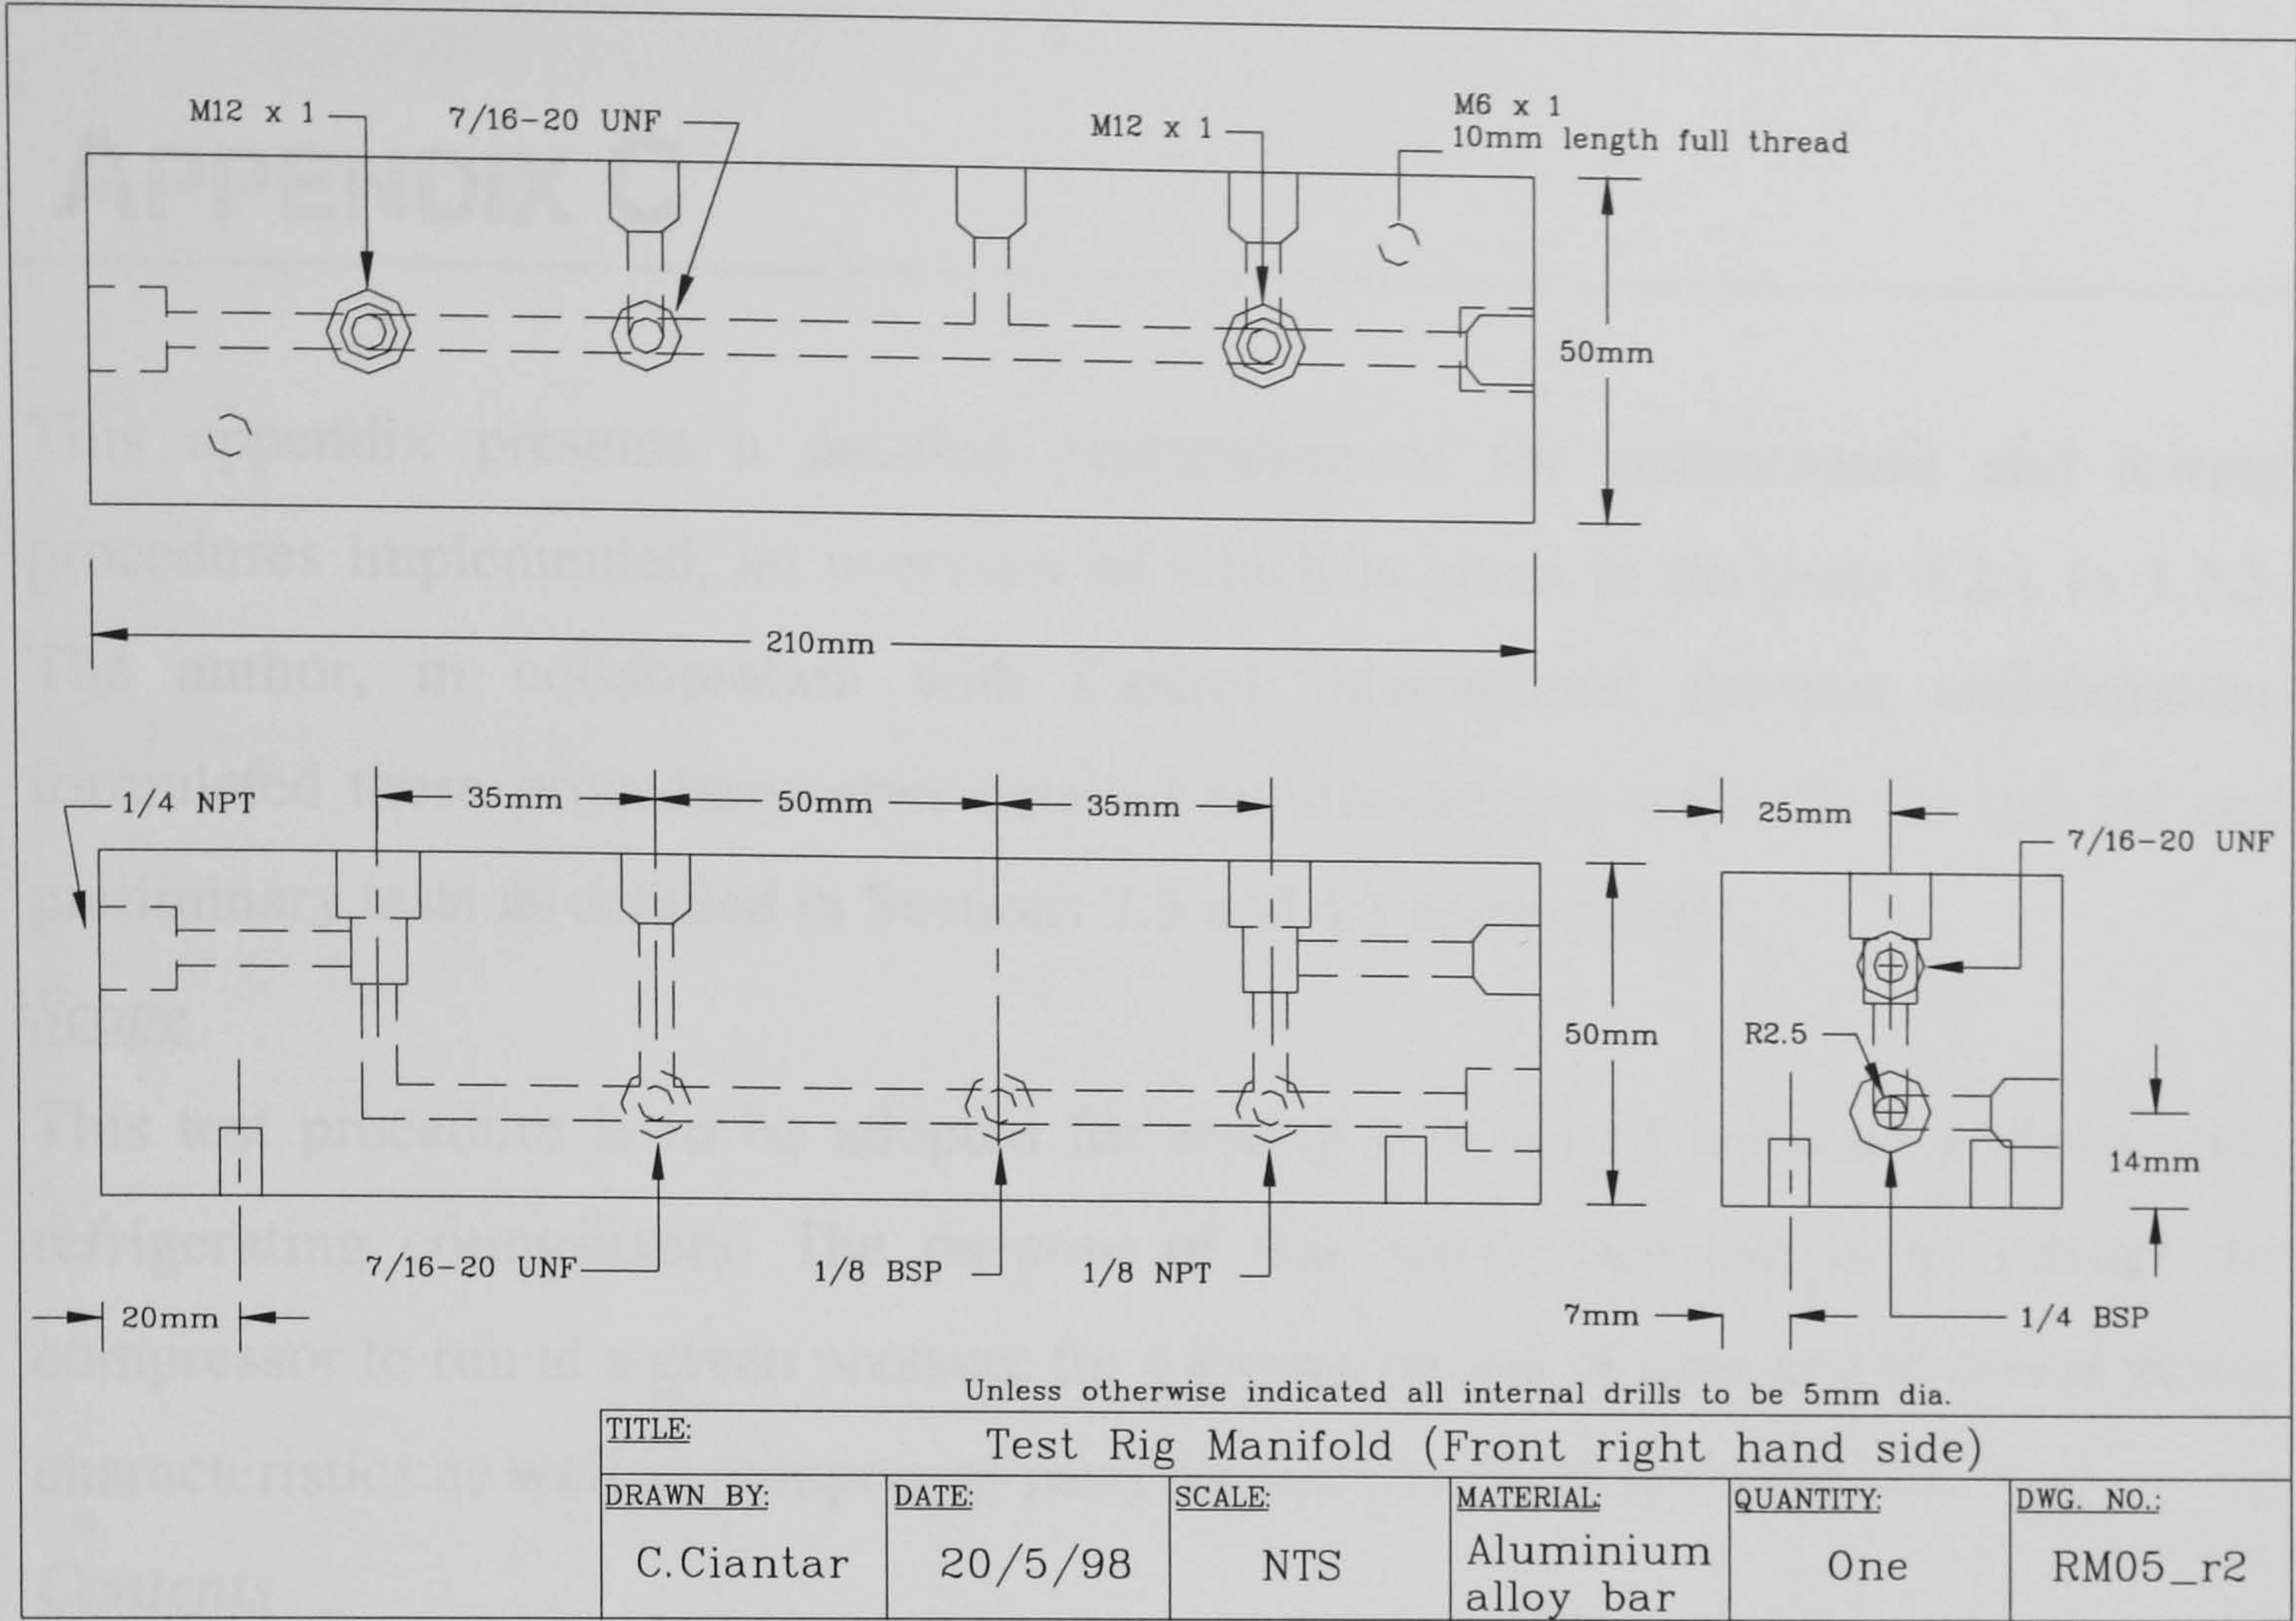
Manifold on front right hand side (see Figure 2.1)
